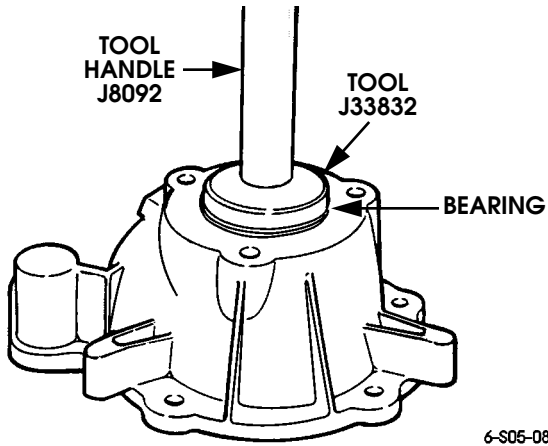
Installing Mainshaft Bearing In Rear Retainer
